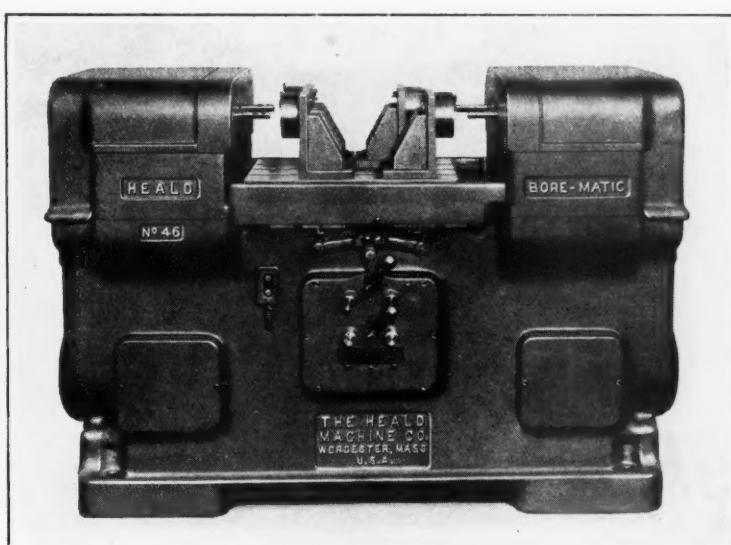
Heald "Bore-Matic" Designed for Finishing Holes with Diamond or Tungsten-carbide Tools
